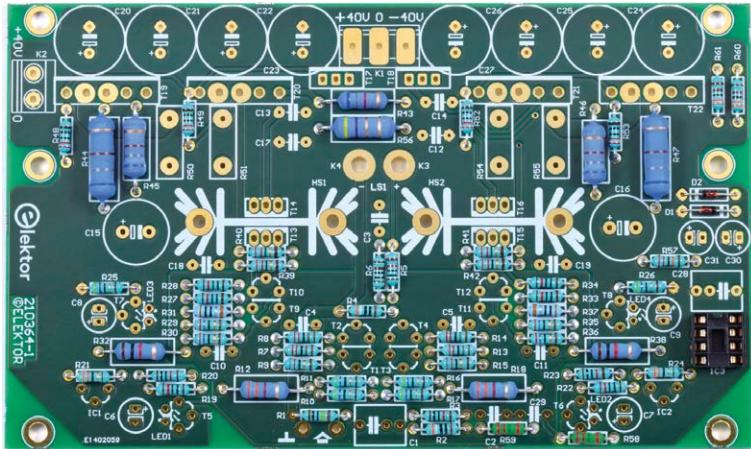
Axial power resistors and 8-pin IC socket (pos. IC3) soldered onto the amp board.
